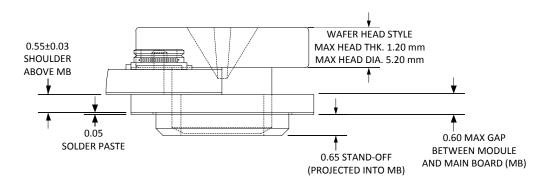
Elevated Single-sided Top Mount Solder Stand-Off
